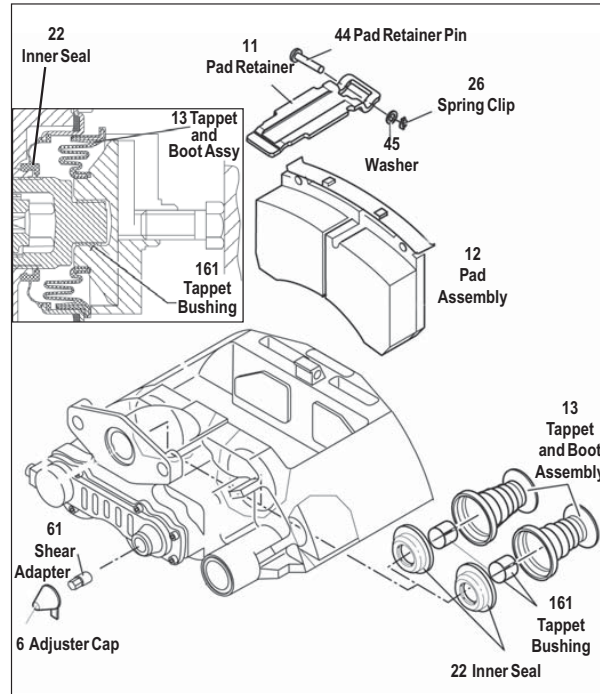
ADB EXPLODED AND SECTION VIEWS
